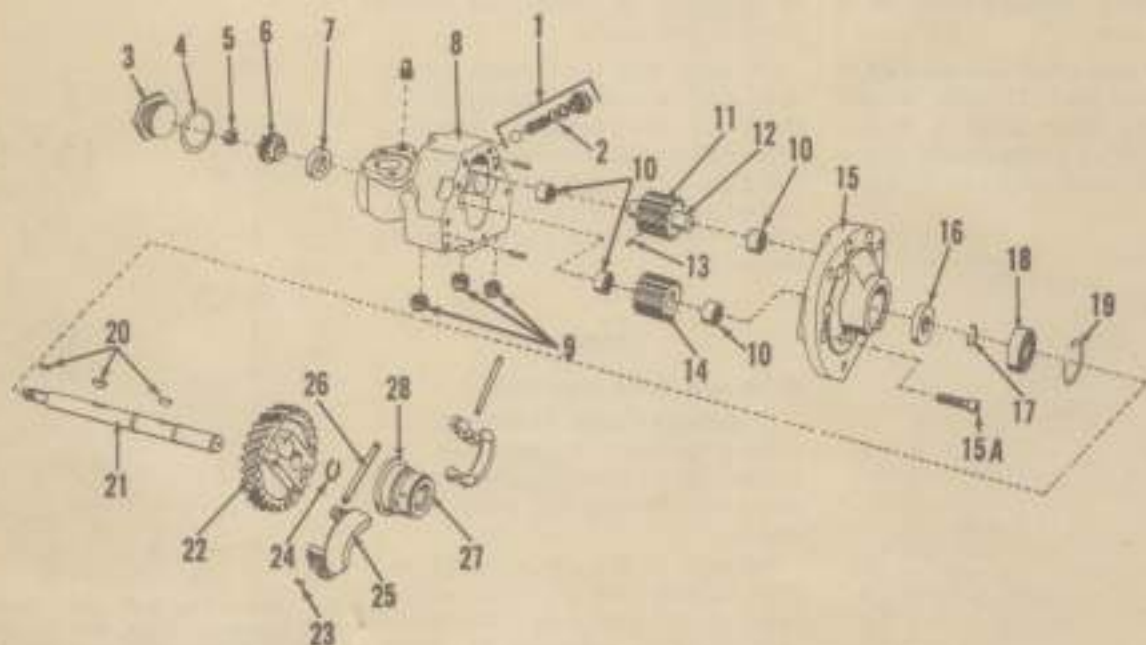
Exploded view of the D-17 non-diesel governor, distributor drive and power steering pump assembly used prior to tractor Serial No. D17-42001. Allen head screws (15A) retain the cover (15) to the body (8).
